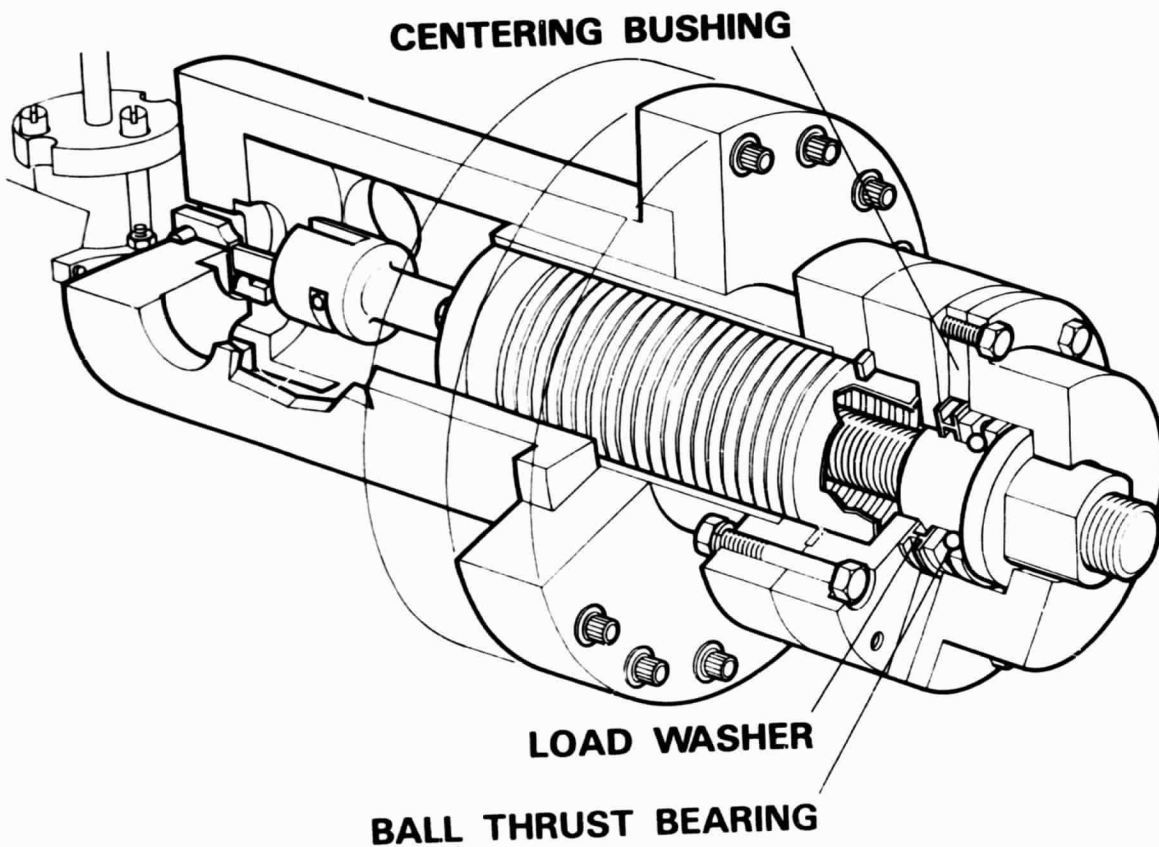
Artist's drawing of a mechanical test fracture device for Auger electron spectroscopy.
